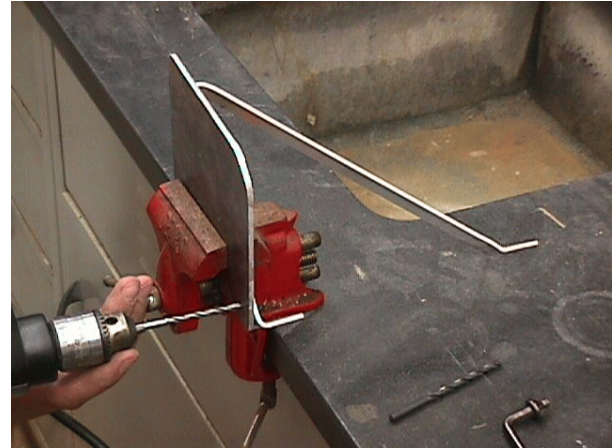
Drilling the diamond-shape Al plate and strap. After drilling to accept the #10 screws, the hole is countersunk.
